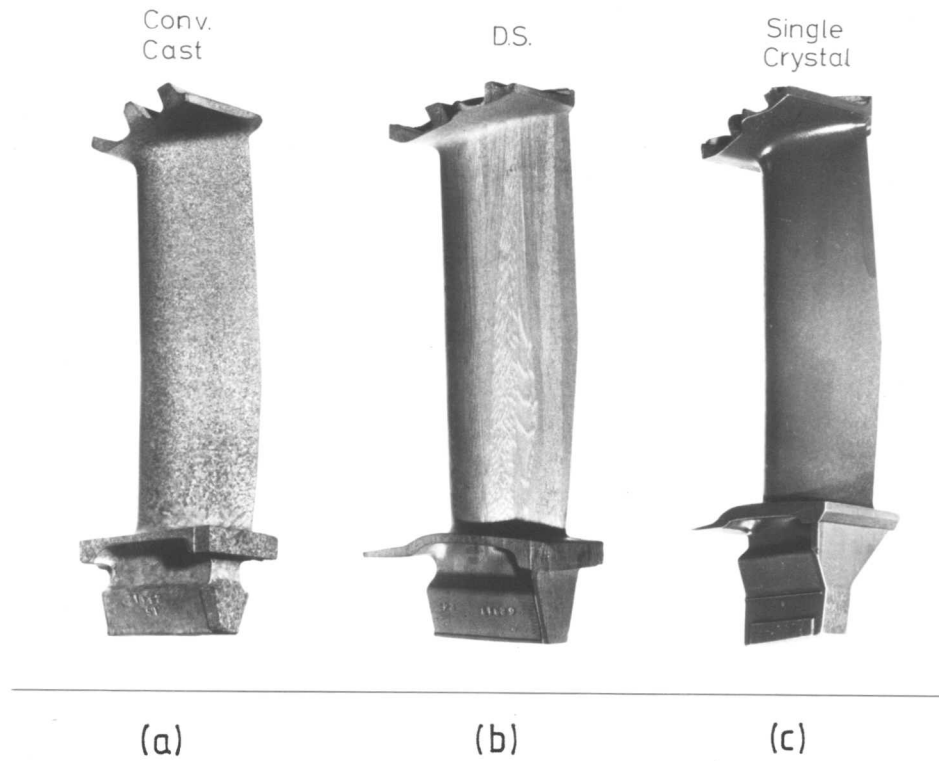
Half scale photograph showing the macrostructures produced by (a) conventional casting, (b) directional solidification, and (c) single crystal casting.
